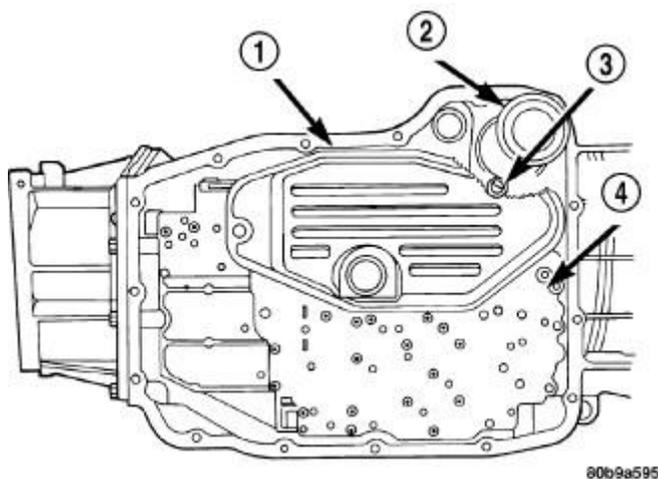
Primary Oil Filter & Oil Cooler Return Filter
